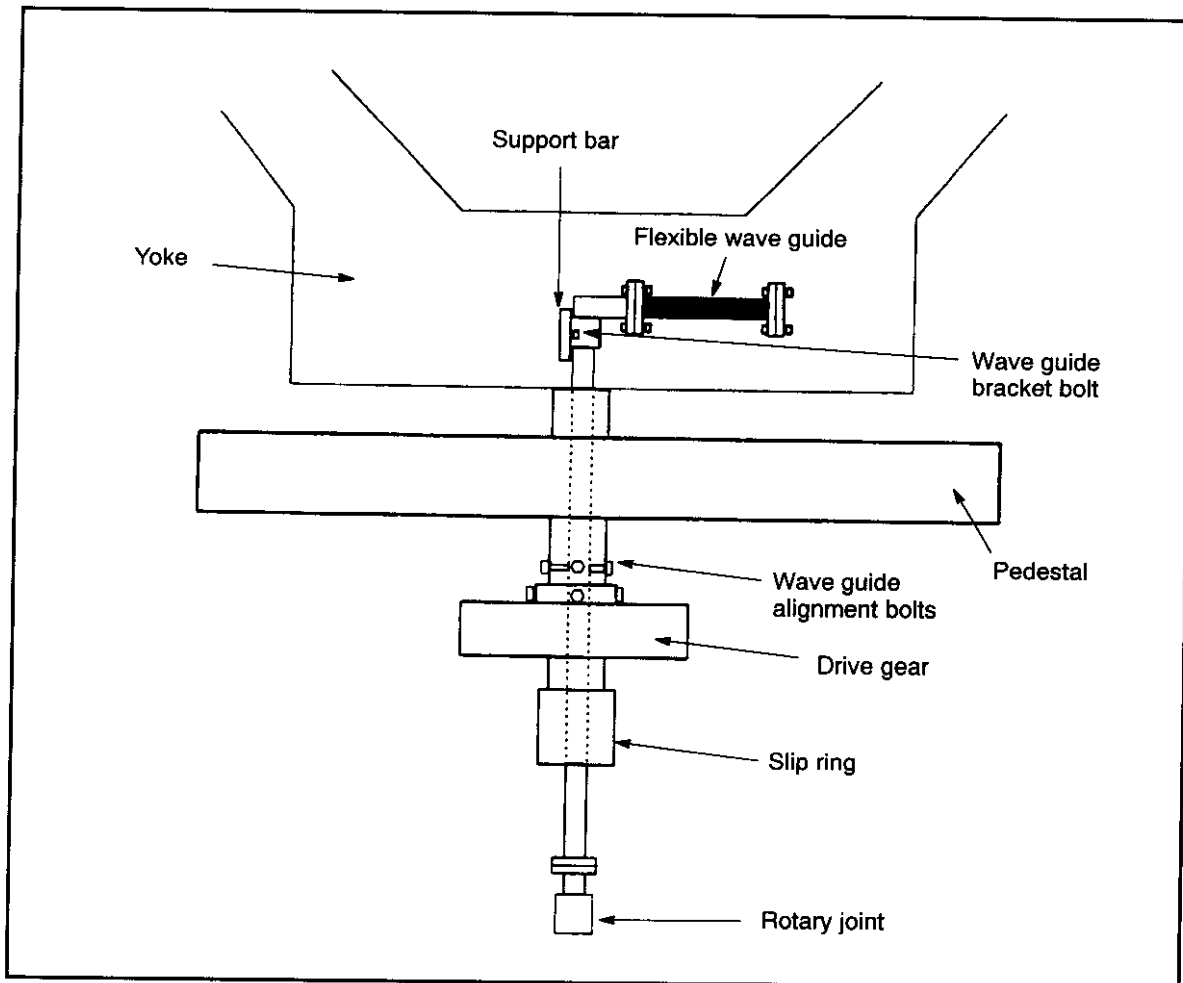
Side View of Rotating Wave Guide Assembly Through Antenna and Pedestal.
